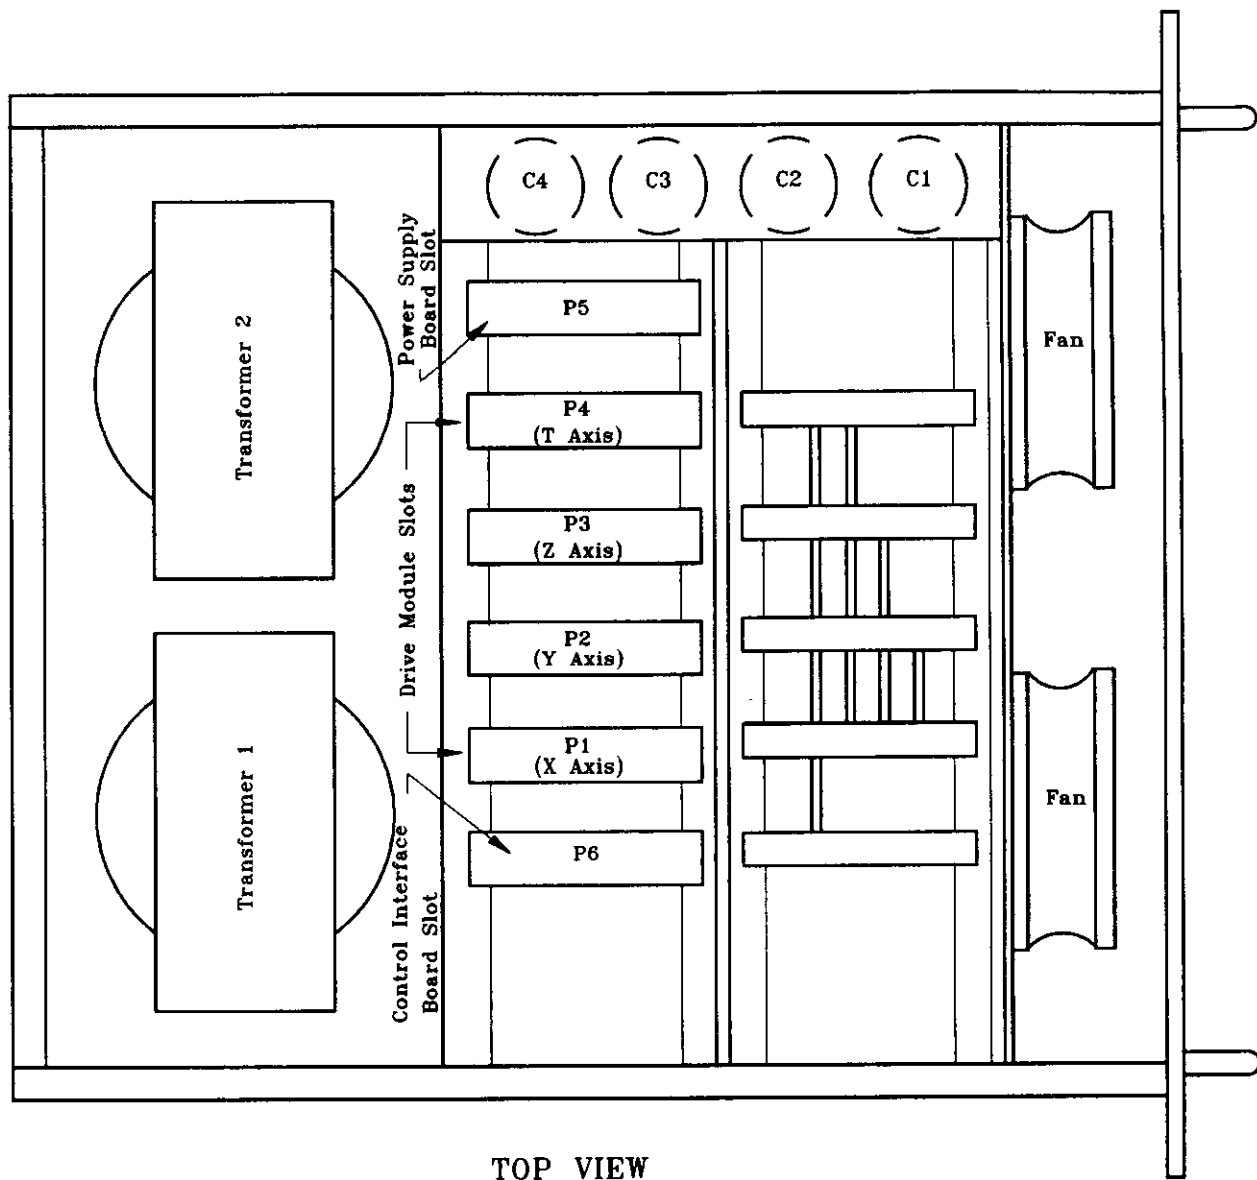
Outline of the U14H Chassis with Top Cover Removed
